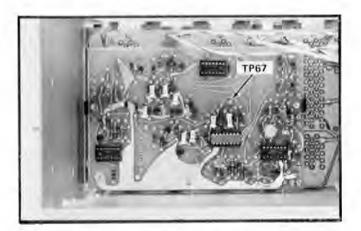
Location of TP67 on Logic board (shown with power unit removed).
